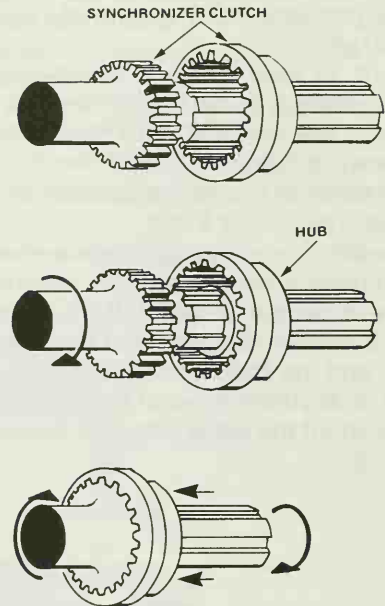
A synchronizer clutch is a device that connects two shafts or connects a gear to a shaft. (General Motors Corporation)
